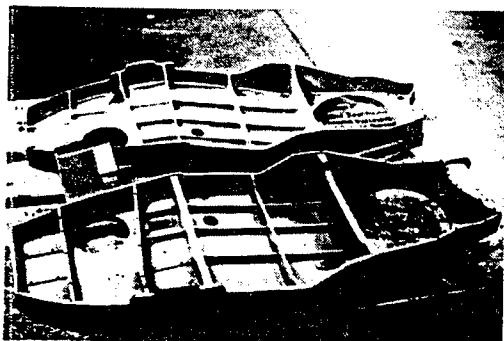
Tip rib for V-22 Osprey at rear. In front is a fabricated Almen fixture made from plastic.
